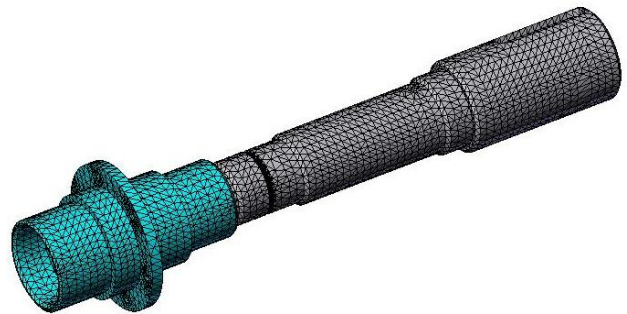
A 3D meshing of turbine shaft – main shaft subassembly.
